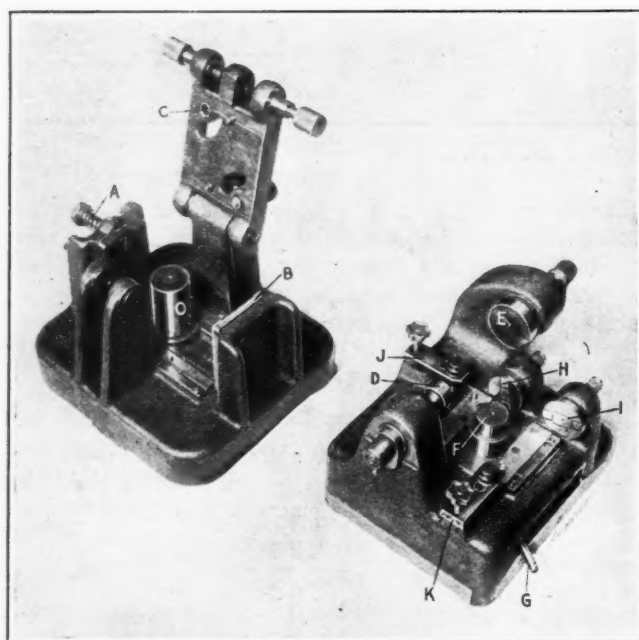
Two Generator Inspection Fixtures somewhat Different from those previously illustrated
